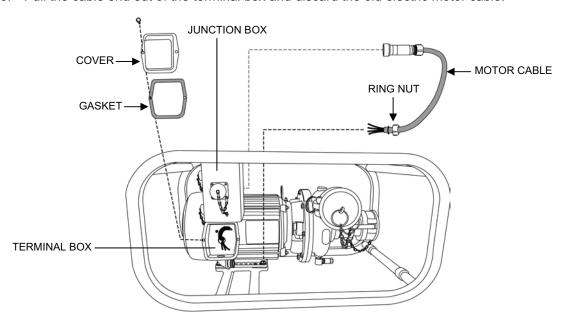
MF Feed Pump Electric Motor Cable Replacement.
